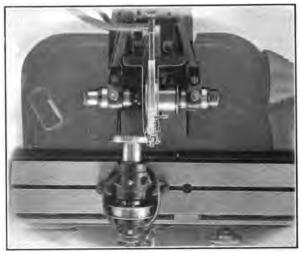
Face grinding using face chuck shown in section in Fig. 273.
